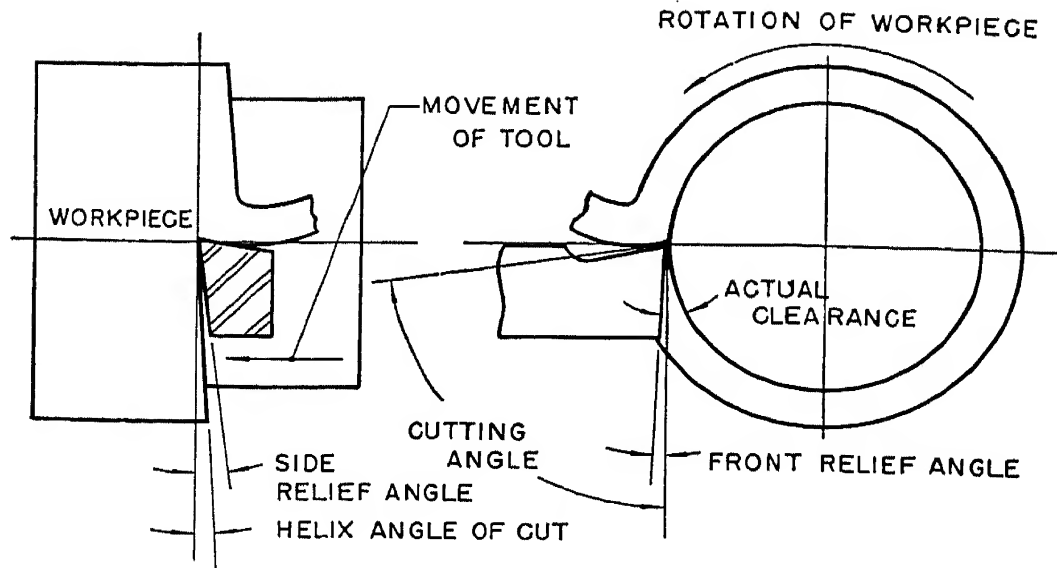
How the clearance angles on a lathe tool prevent rubbing.
